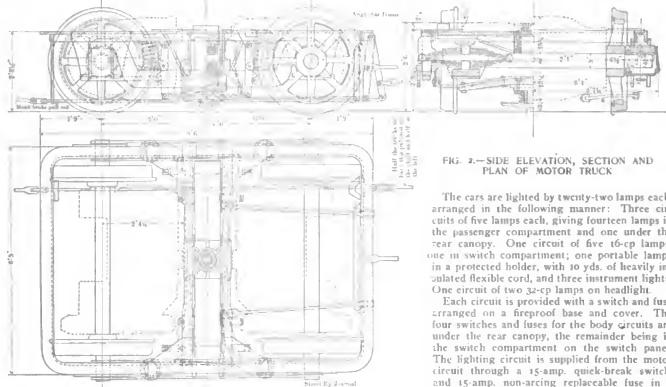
SIDE ELEVATION, SECTION AND PLAN OF MOTOR TRUCK
